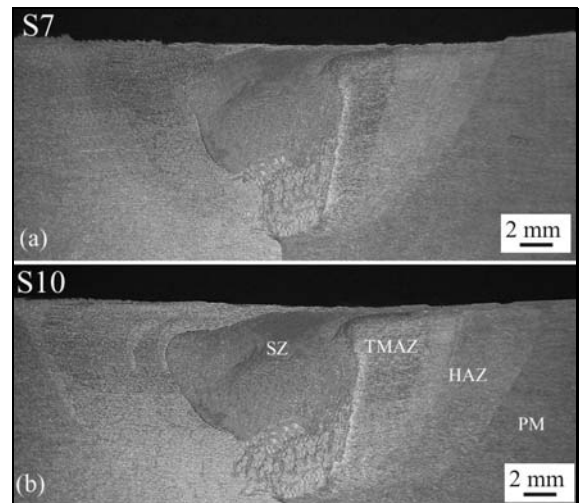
Microstructure of the nugget zone: (a) the specimen welded at rotational speed 1120 rpm using treated cylindrical tool, (b) the specimen welded at rotational speed 1400 rpm using treated cylindrical tool.
